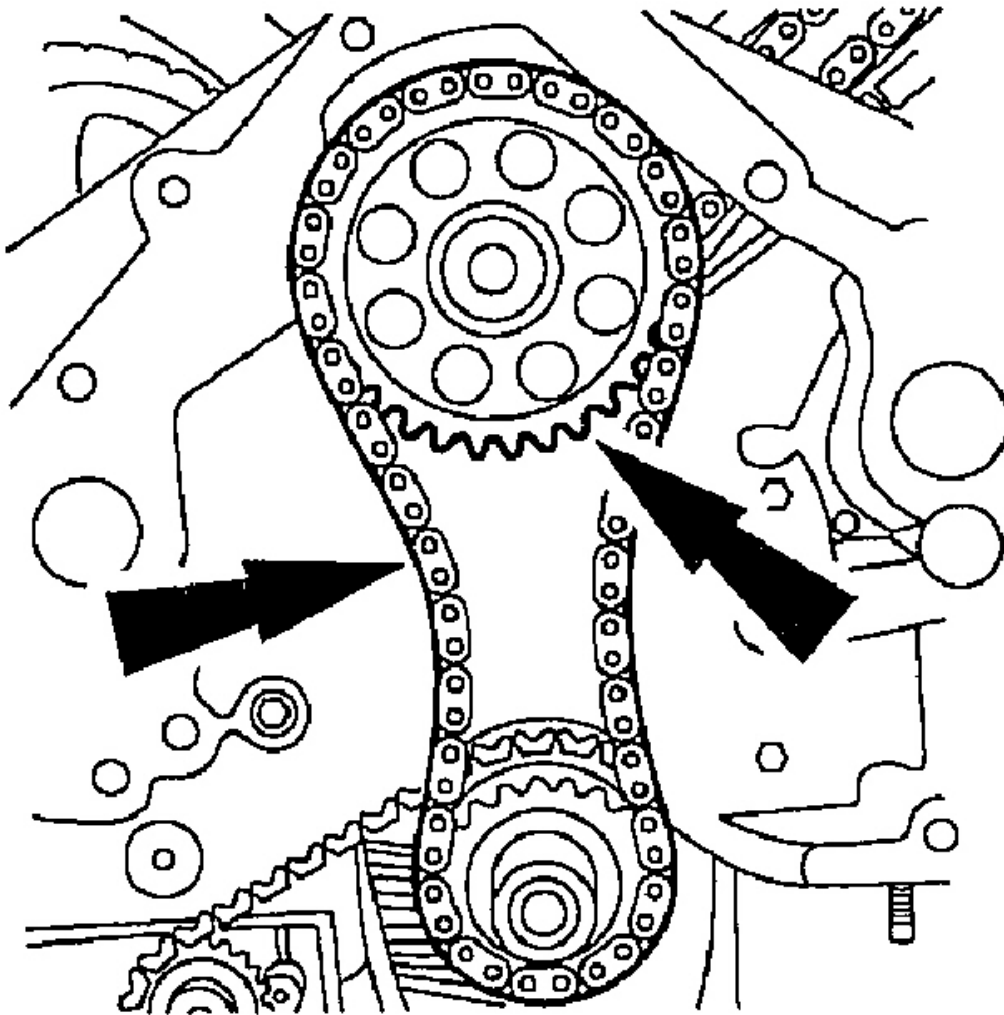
Installing Front Cassette & Bolt With Camshaft Drive Chains
